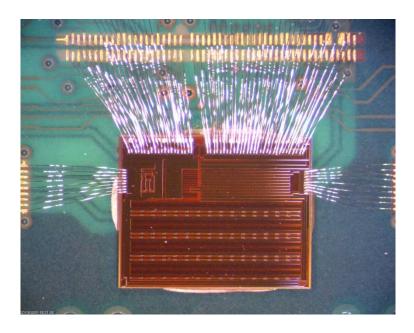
Picture of the p-TDC ASIC prototype wire bonded to the test printed circuit board
